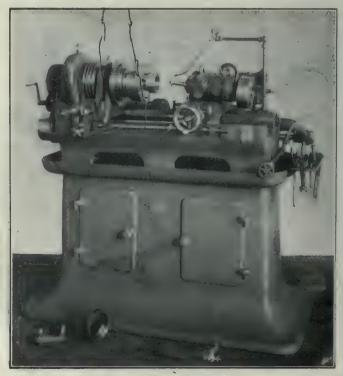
,-Pratt & Whiting Thread Milling Machine for Internal Thread Milling.
